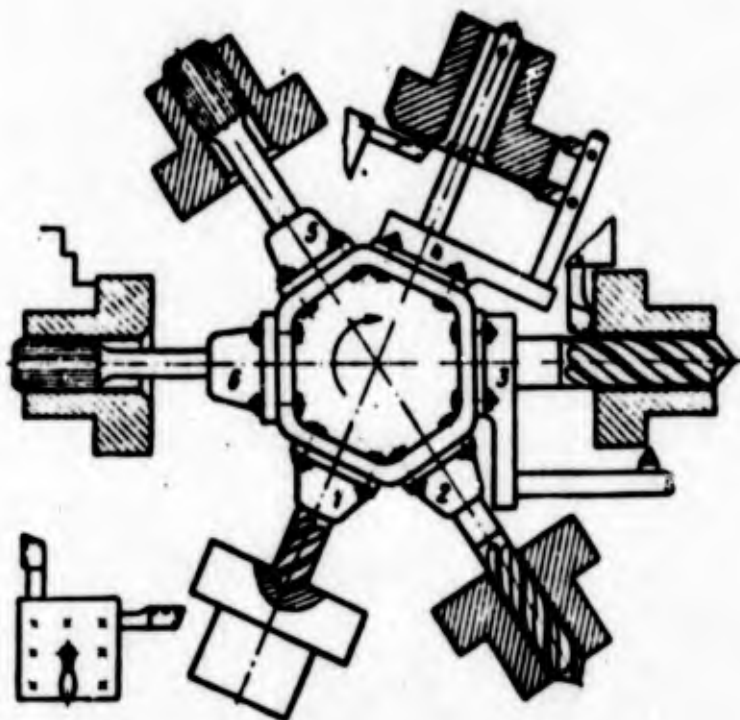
Arrangement of turret lathe for machining a gear blank.
